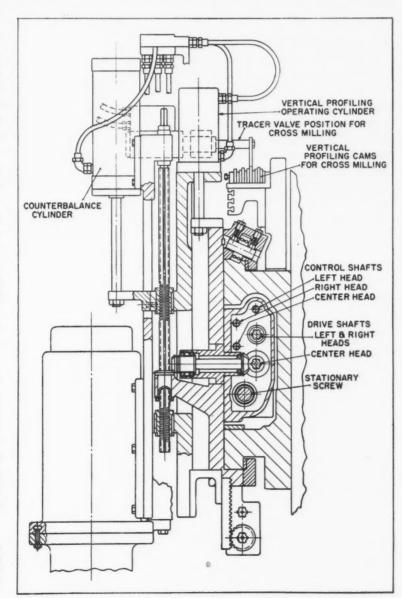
The power take-off from the rail shafts for operating the front slides of the milling heads is illustrated in this drawing, there being a simplified arrangement of a single drive-shaft to the rail-heads
